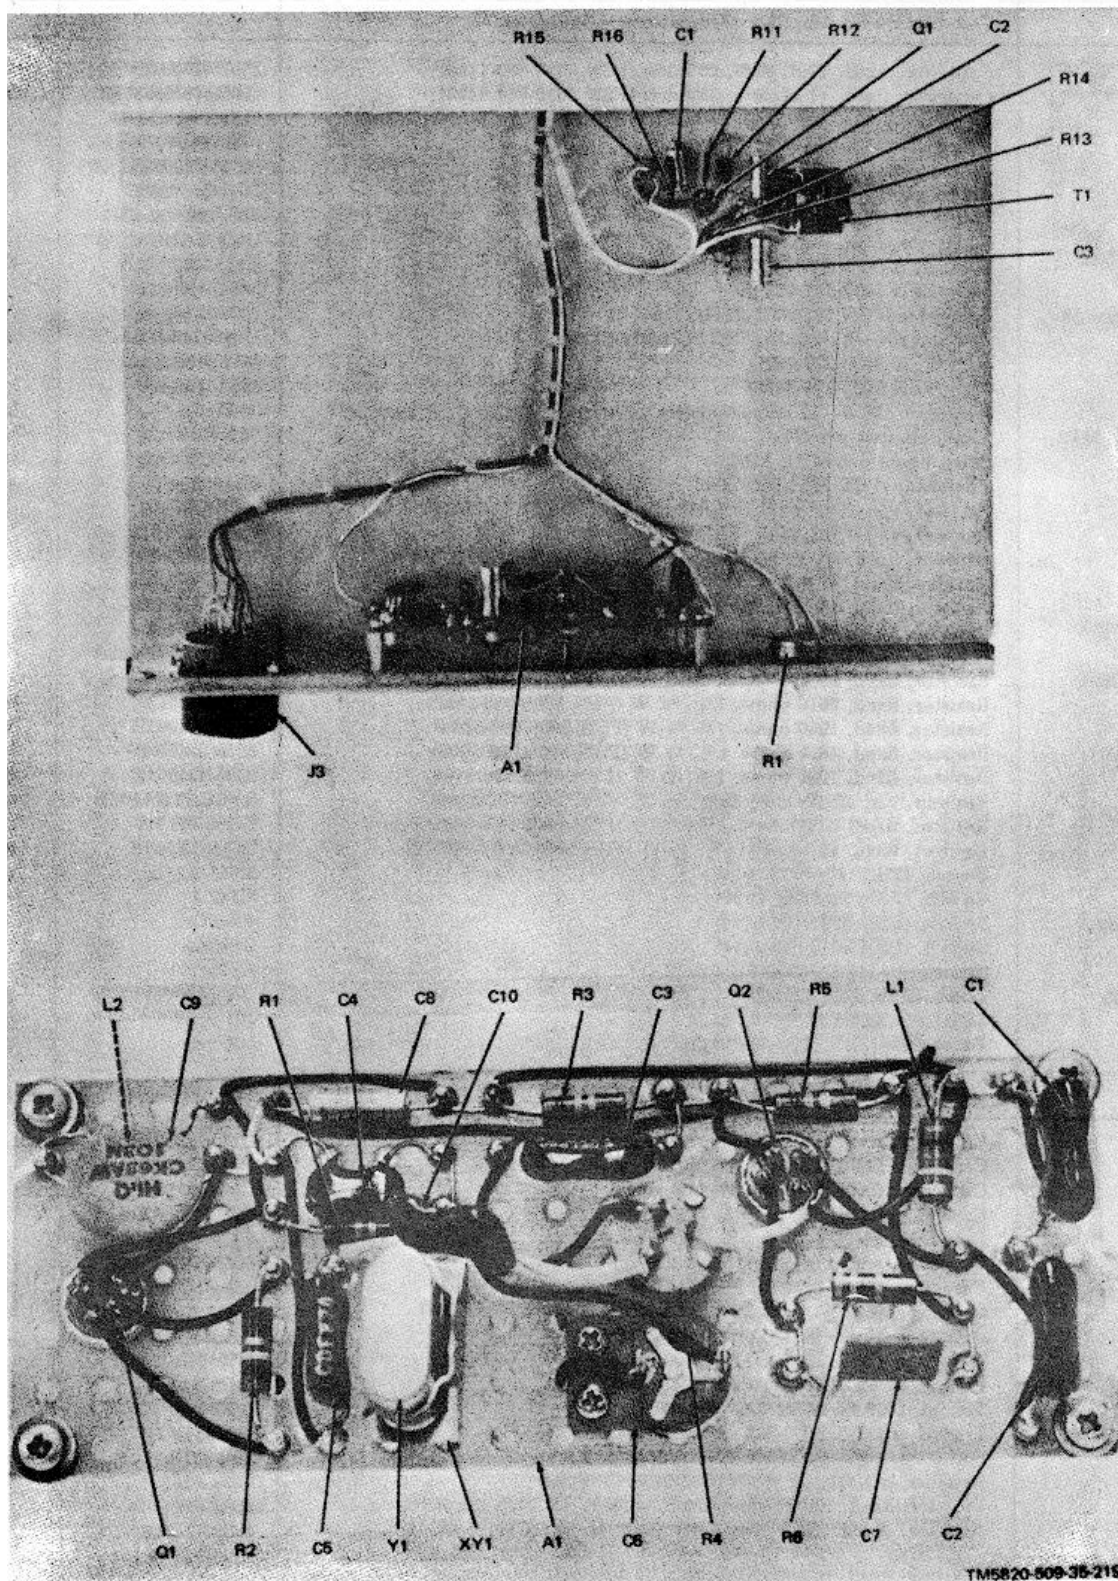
Test Fixture for Amplifier-Modulator AM-3507/PRC-47, Chassis Parts and Subassembly A1 Placement.
